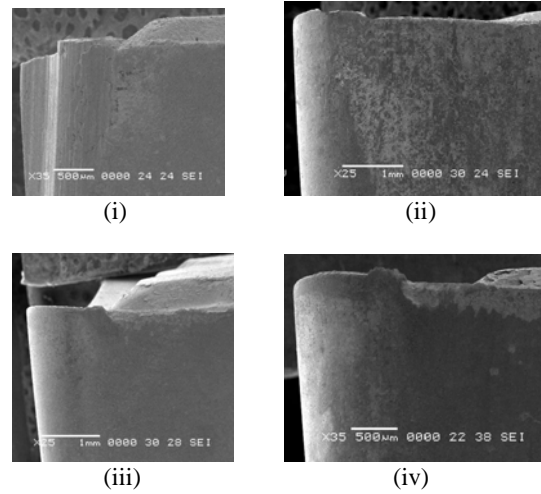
Scanning electron microscope (SEM) images of the flank of the tool inserts after a machining time of 28 minutes at different cooling conditions as shown in Fig.
